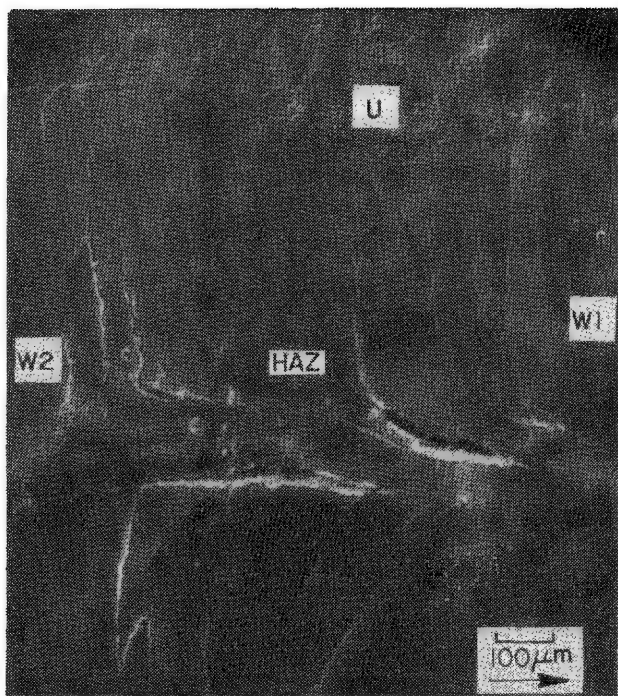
Weld-quench cracks on capsule inner surface.
